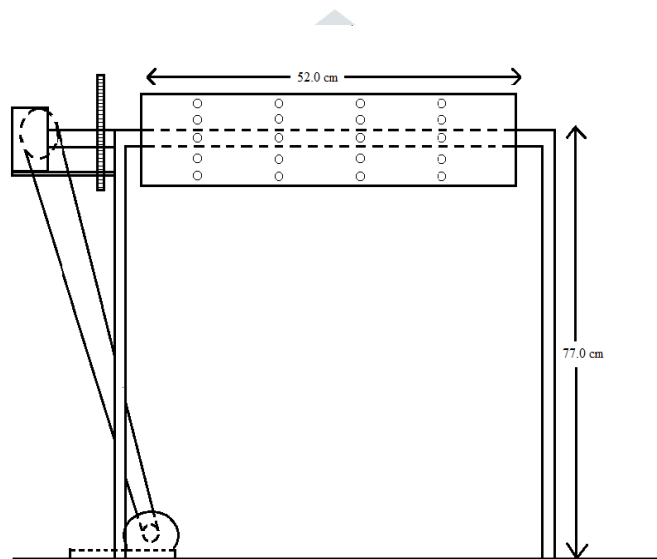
Front view of the Machine (AutoCAD Diagram)
